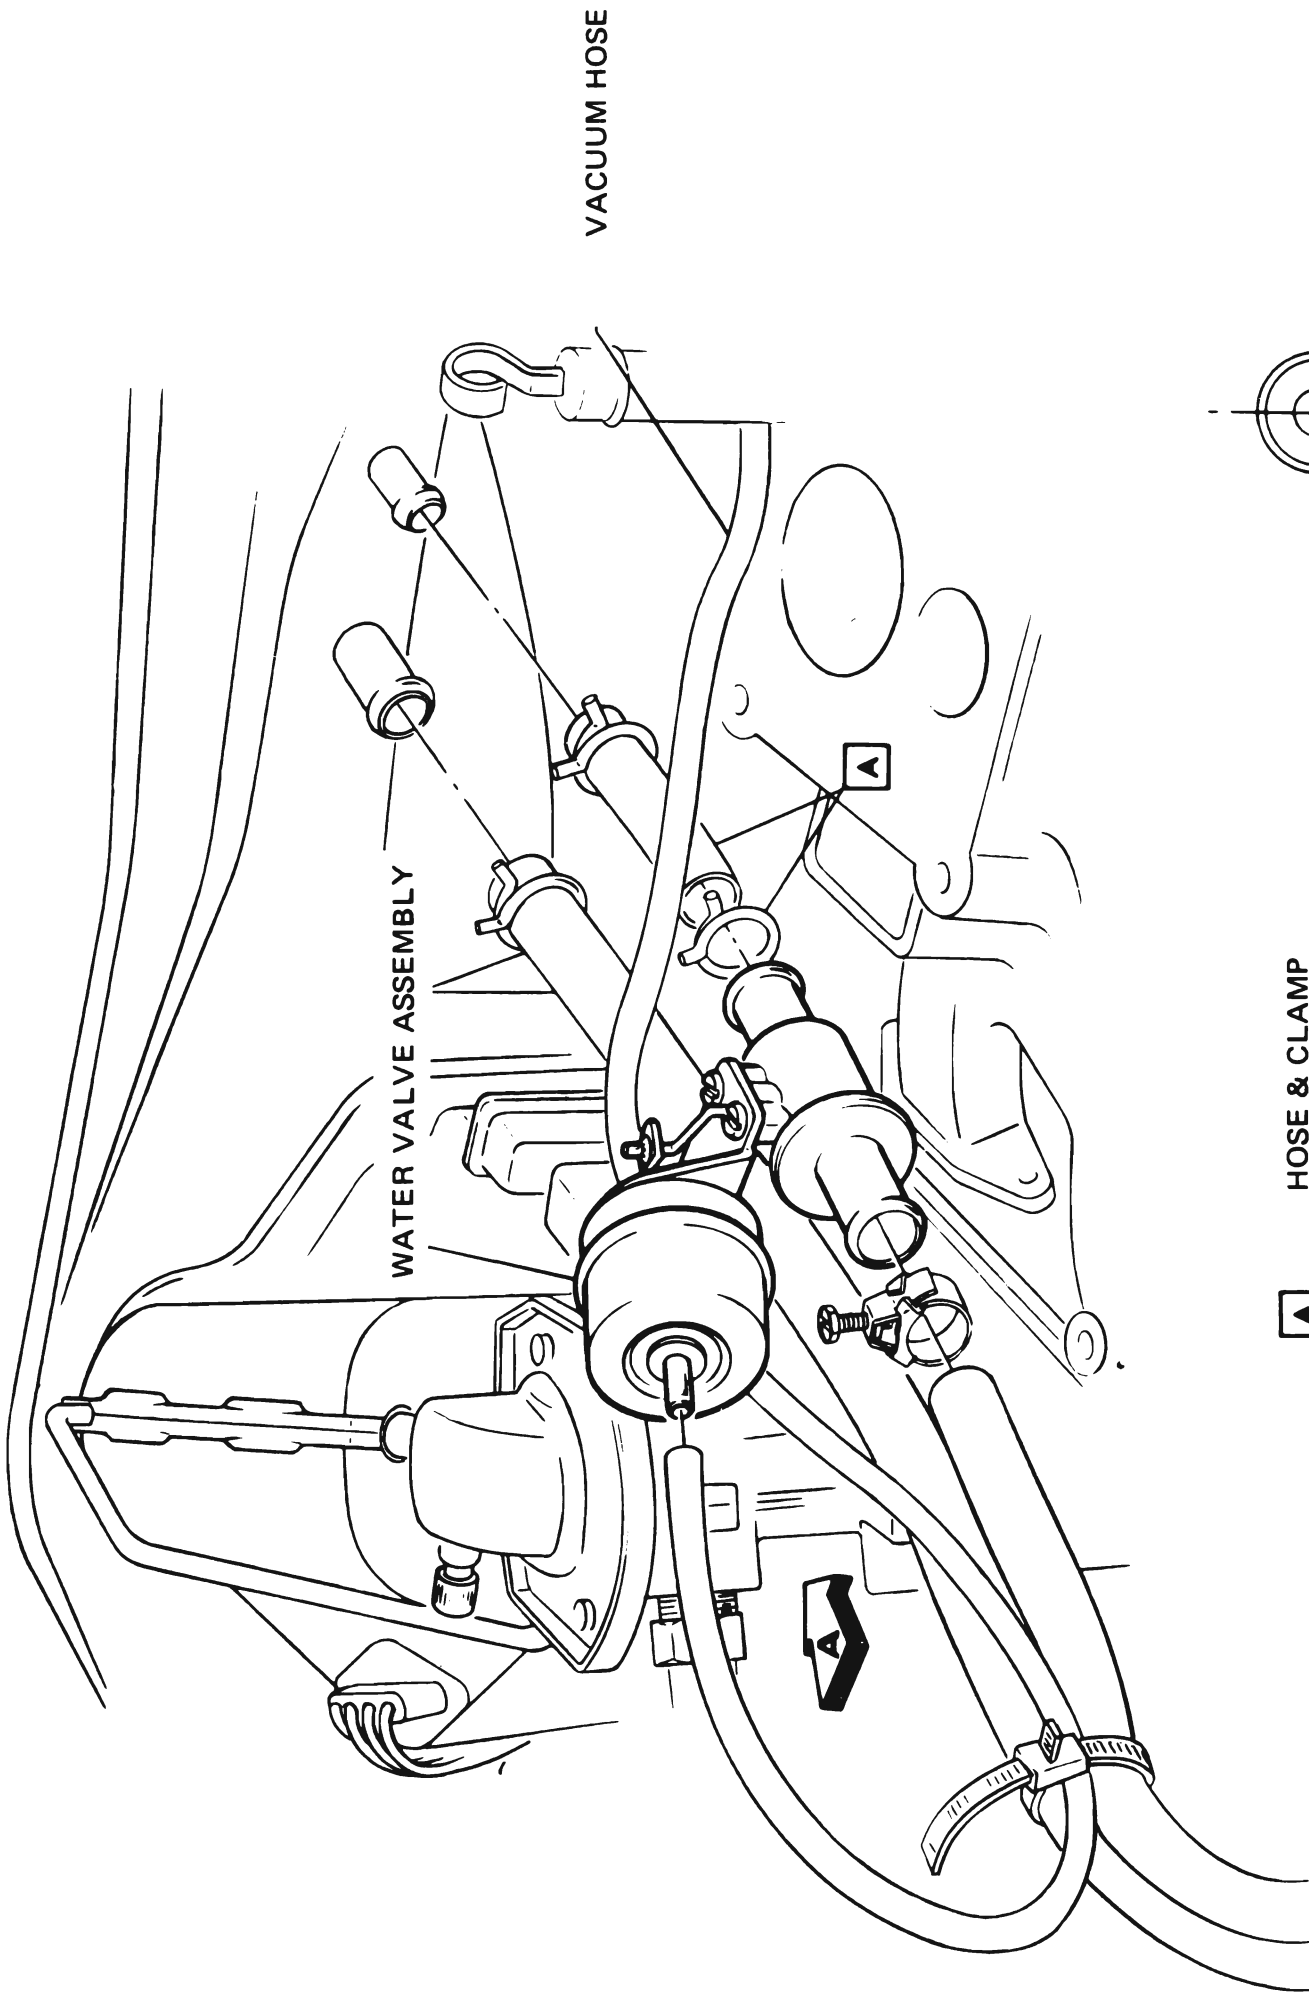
B-210 A/C Heater and Defroster Assembly - B-C-E Series
